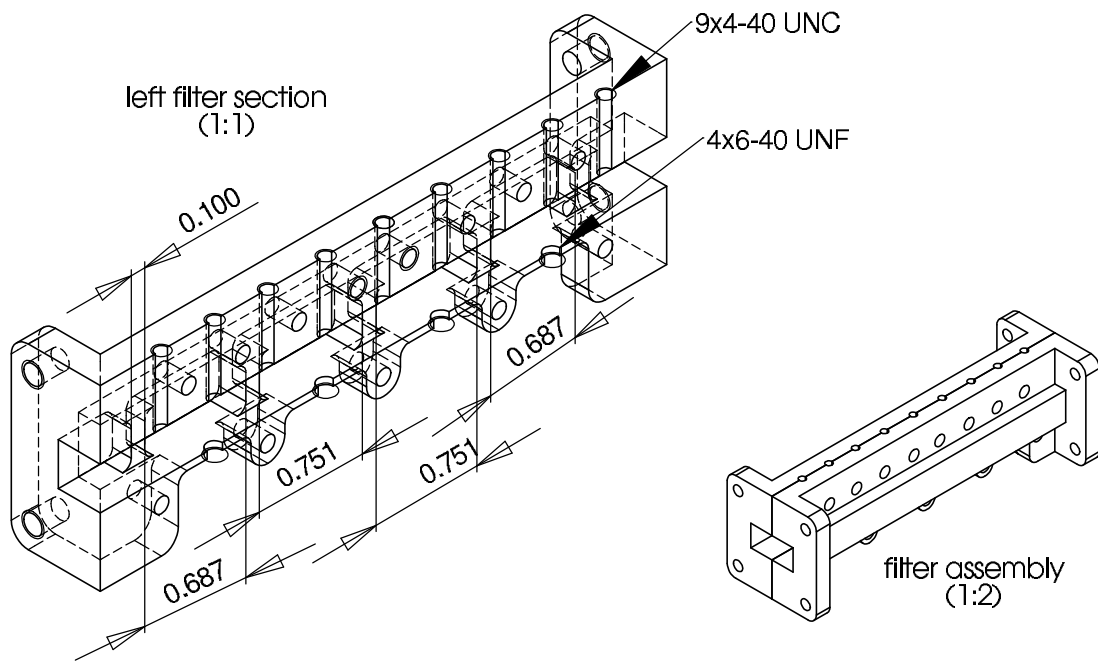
Scale drawings of a prototype compensated filter (all dimensions in inches)
